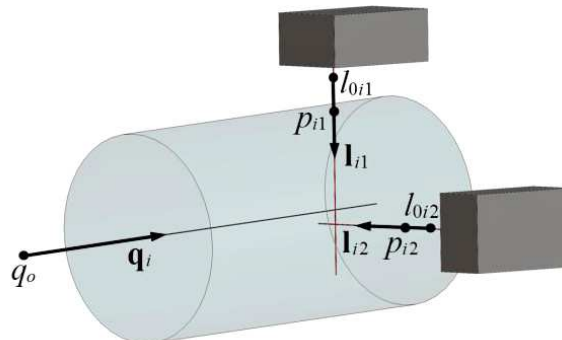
Geometrical model of the passive part of the air bearing and the measurement rays
